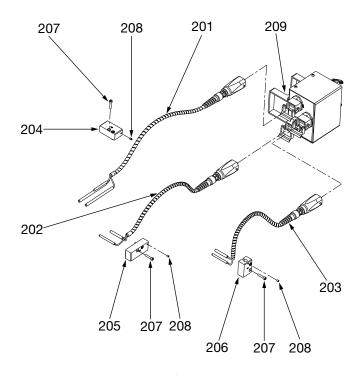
Disassemble Cylinder of 50 cc and 100 cc
